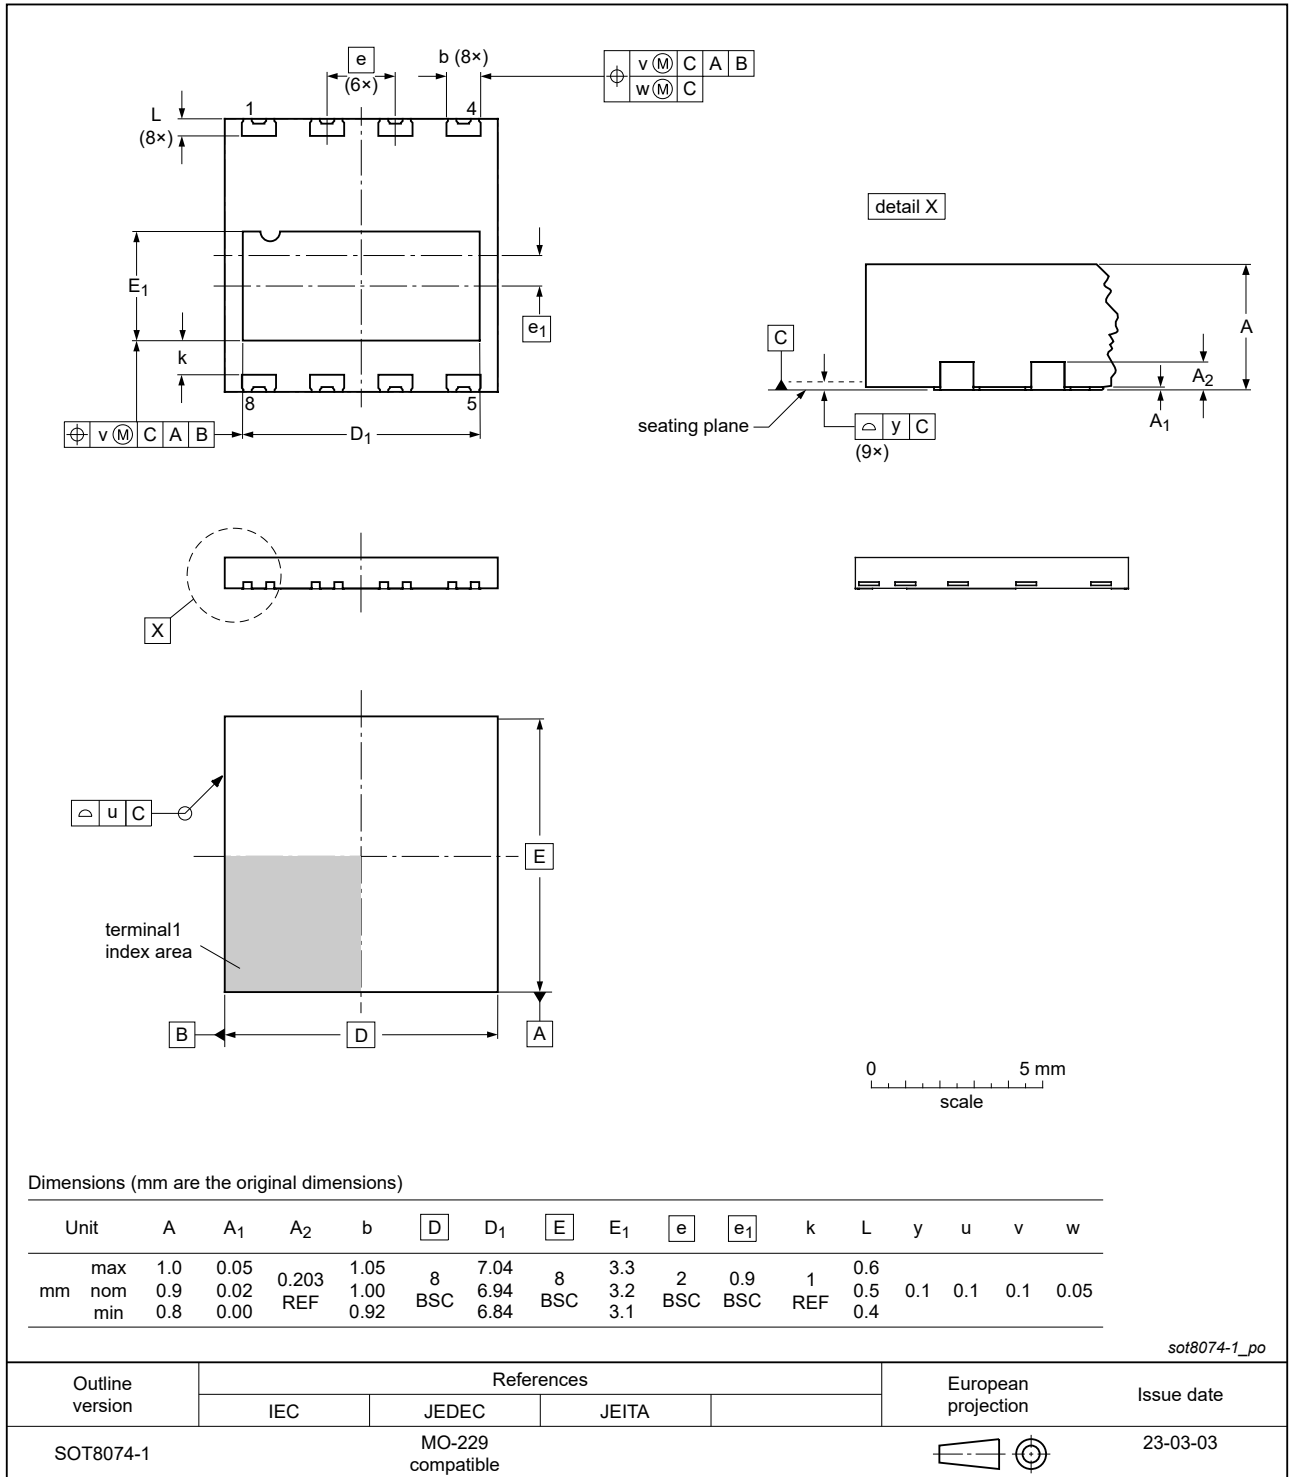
Package outline DFN8080-8 (SOT8074-1)
